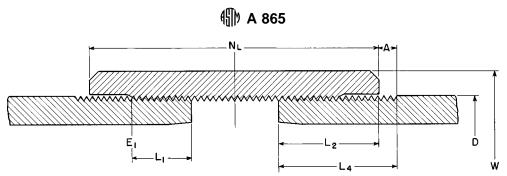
Recessed Taper-Tapped Coupling and Pipe (See Table 4 for Coupling Dimensions)
